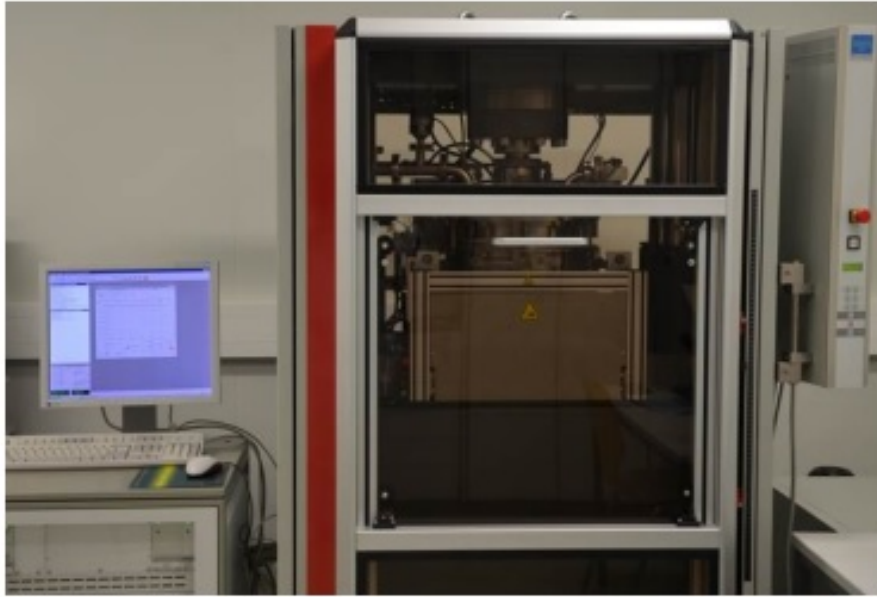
Photo of the used hot embossing machine Jenoptik HEX03.
